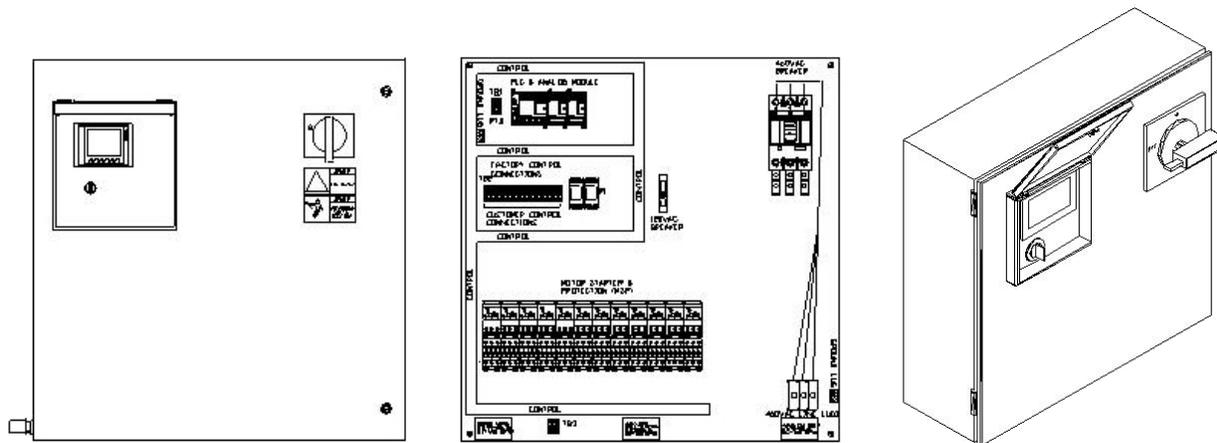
Typical Motor Control Panel for 10-Fan Cooling Tower Module. (VIEWSCREEN® touch screen standard on all Tower Tech T9900 control panels ordered after August 31, 2011.)
